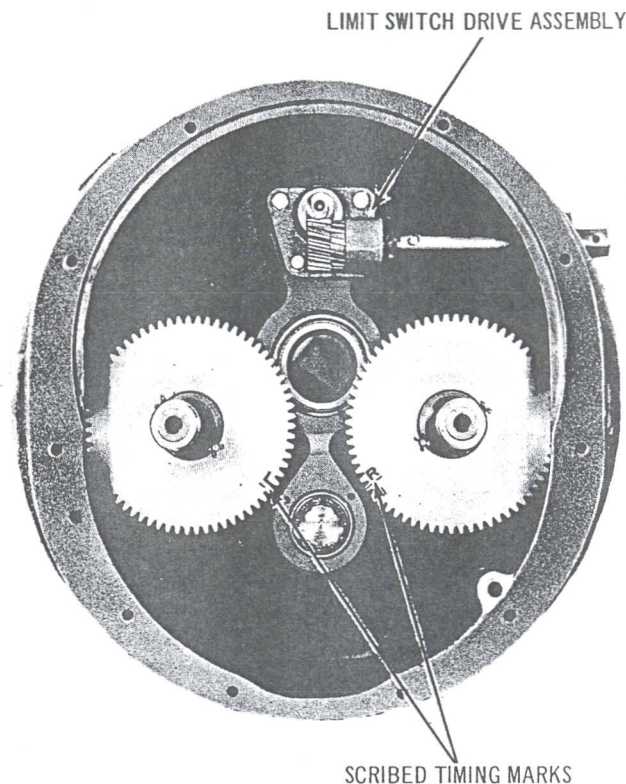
Drum Pinion Shaft Assembly, R.H. Shown
